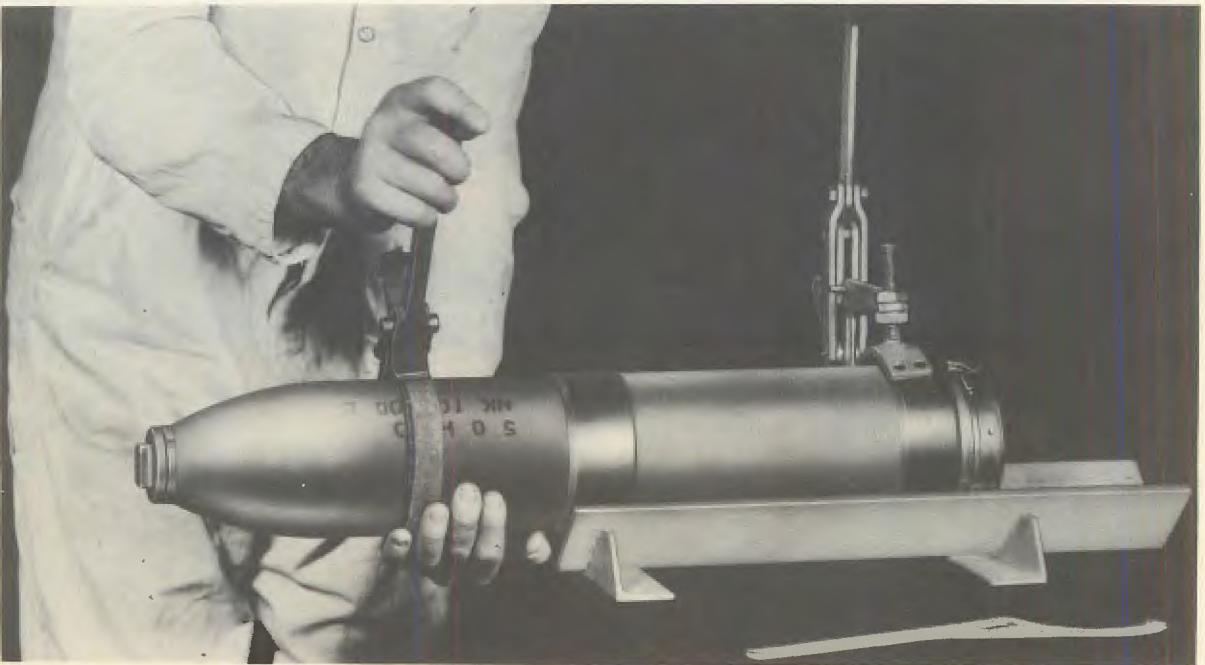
Use of Strap Wrench in Assembly of 5.0-Inch Head and Motor.
